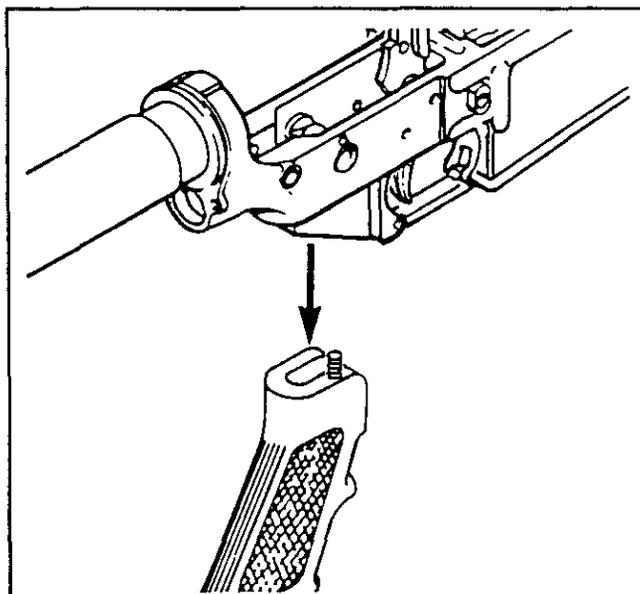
FIRE CONTROL SELECTOR DETENT DISASSEMBLY
